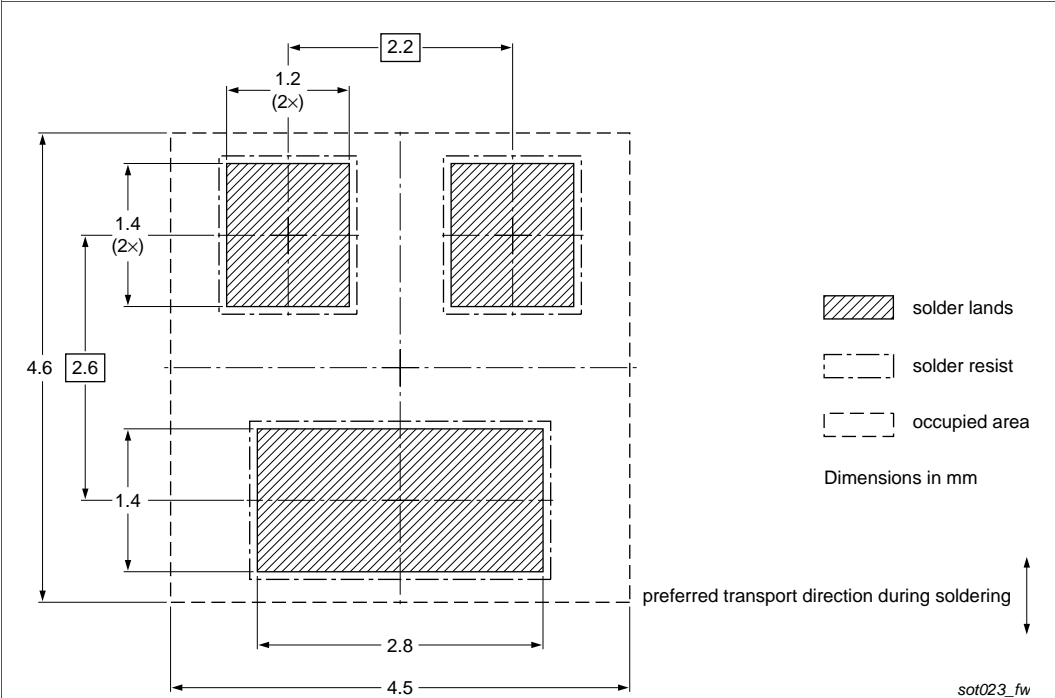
Wave soldering footprint SOT23 (TO-236AB)
